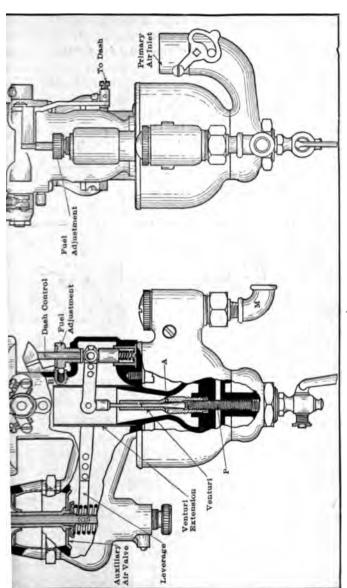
Views Showing 1916 Model Schebler Carburetor Having Mechanical Interlock Between Air Valve and Fuel Begulating Needle, also Dashpot to Prevent Air Valve Fluctuation.
